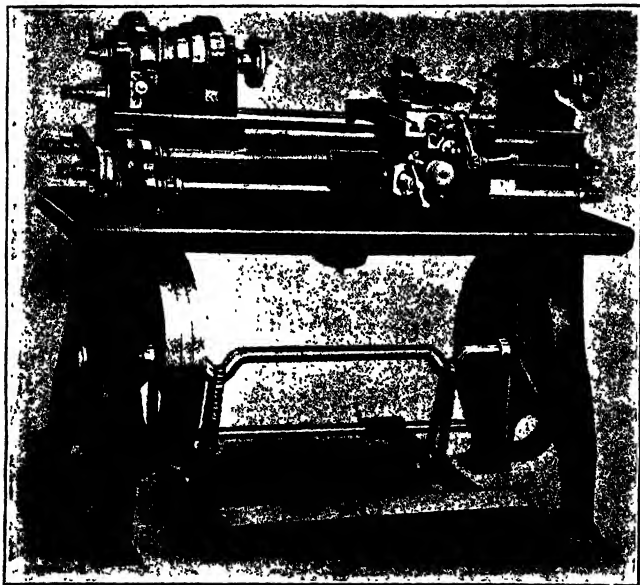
Foot Lathe with Sliding Surfacing and Screw-Cutting Movements.
